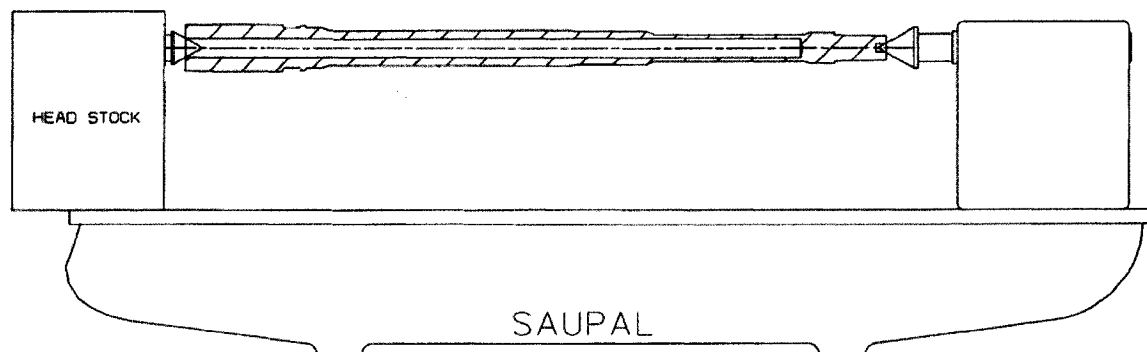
SAUPAL Ultrasonic Inspection Machine
